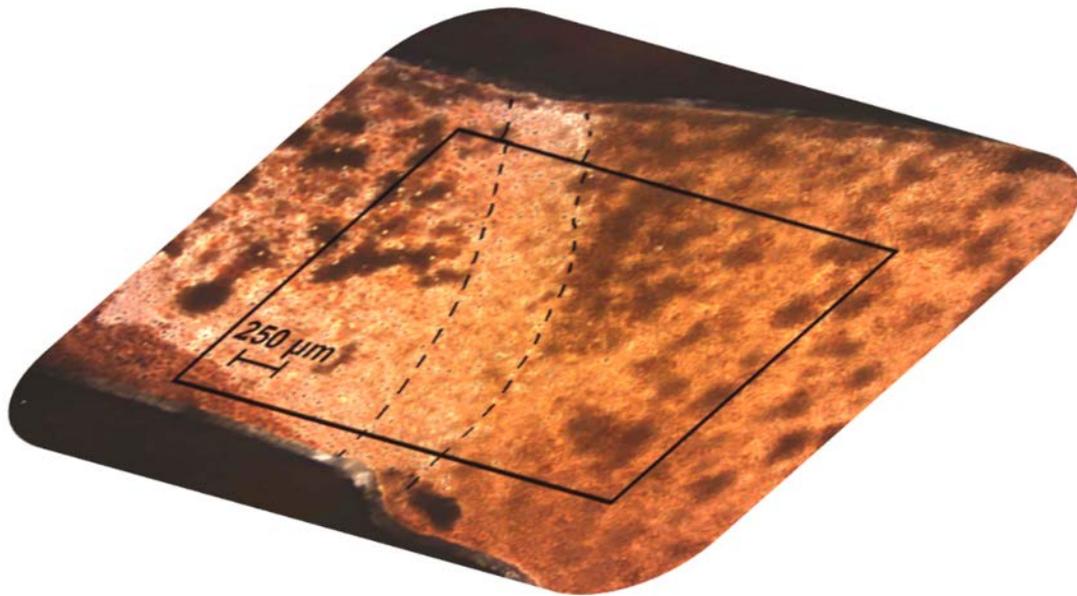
The optical image of the Al alloy specimen with welded joint zone after 500 hours of the material exposure. The weld interface is indicated by dashed line.
